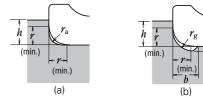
2 Chamfer Dimensions, Fillet Radius, and Shoulder Height
